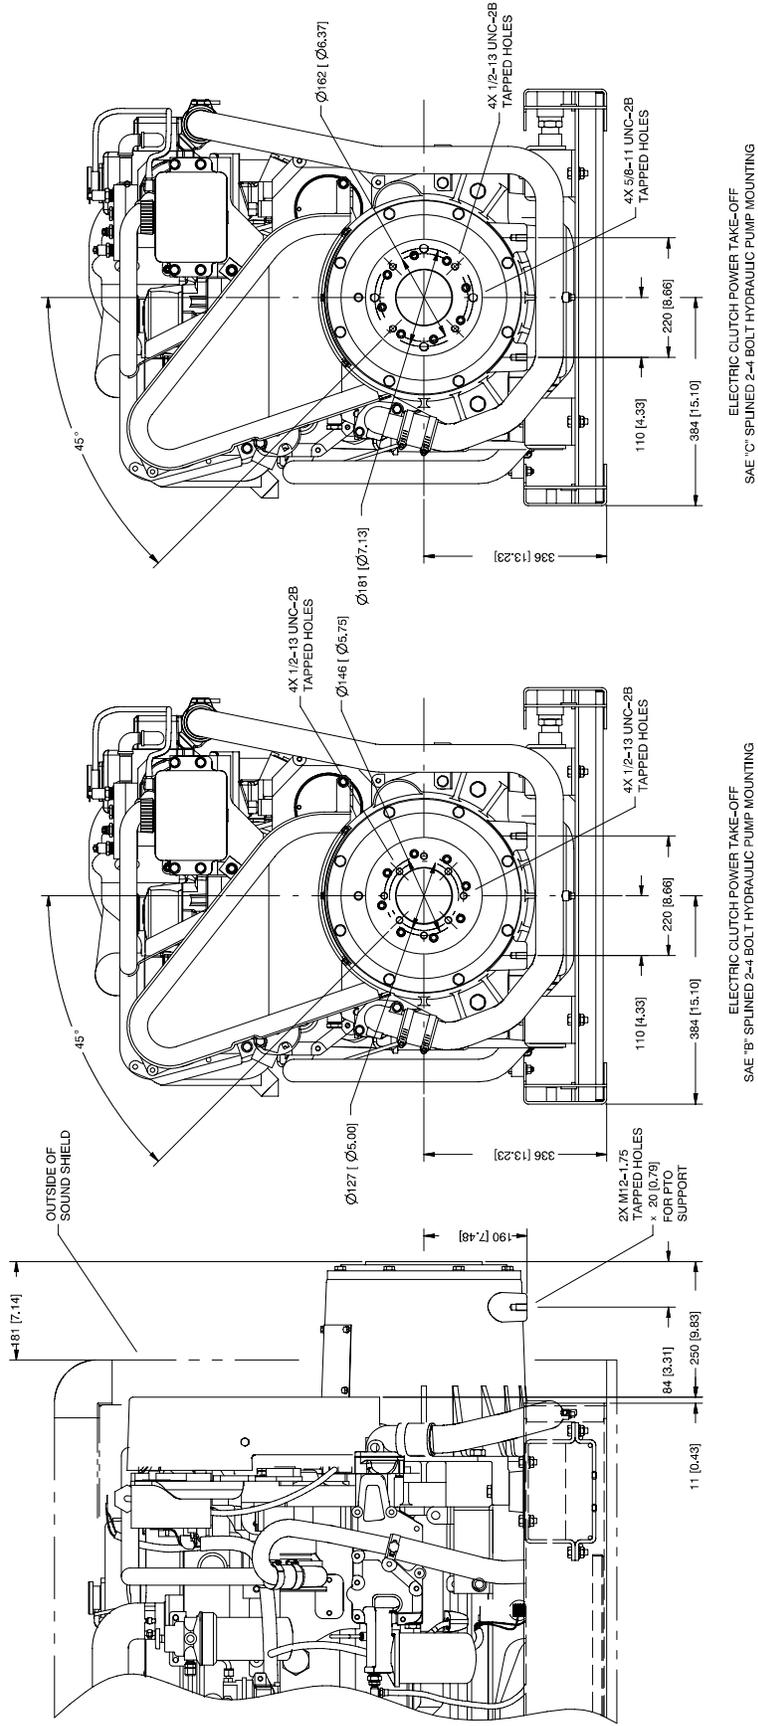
Dimension Drawing, 40EOZD and 33EFOZD with Sound Shield
